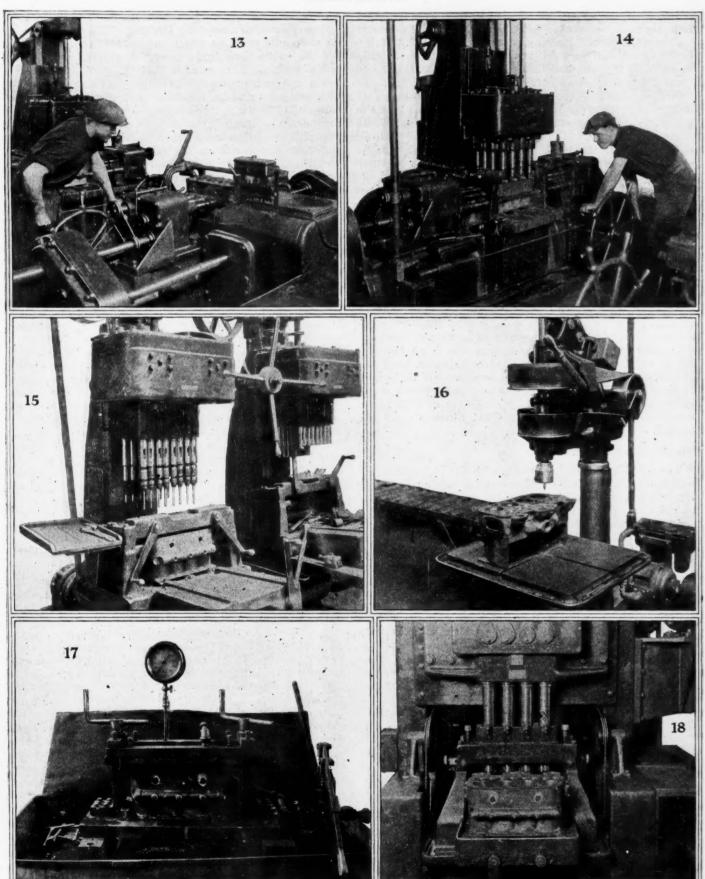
Two-way Foote-Burt tapper which taps three water circulating plug holes on the rear side of the block, the gas intake manifold flange cap screw hole and two valve inspection cover stud holes simultaneously. Fig. 14—Three-way Foote-Burt tapper which taps 35 holes simultaneously in the Olds cylinder blocks. Fig. 15—Foote-Burt machine for semi-finish reaming the valve stem guide holes. Fig. 16—Garvin tapper which finish taps all the bolt holes for the cylinder head and exhaust manifold studs. Fig. 17—Fixture used for water testing the cylinder blocks. The water test is given at 60 lb. hydraulic pressure. Fig. 18—Foote-Burt machine for giving the cylinder blocks a semi-finish ream. One man runs three of these machines, which reams four cylinders bores at a time and takes off .064 in. of metal, leaving .020 in. for finish
